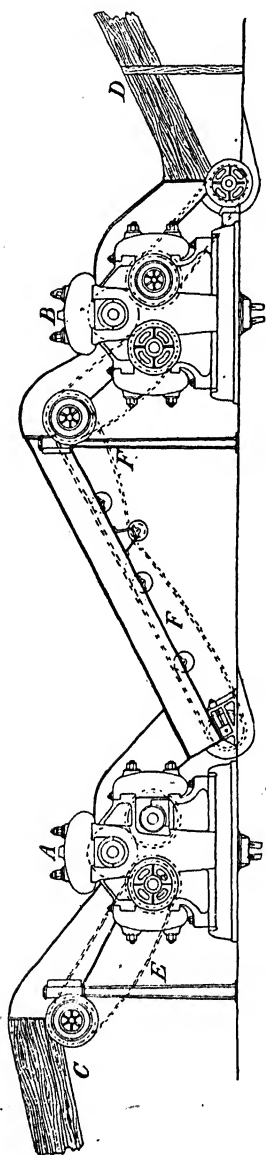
Elevation of tandem double-crushing plant, each mill being worked by its own separate engine.
